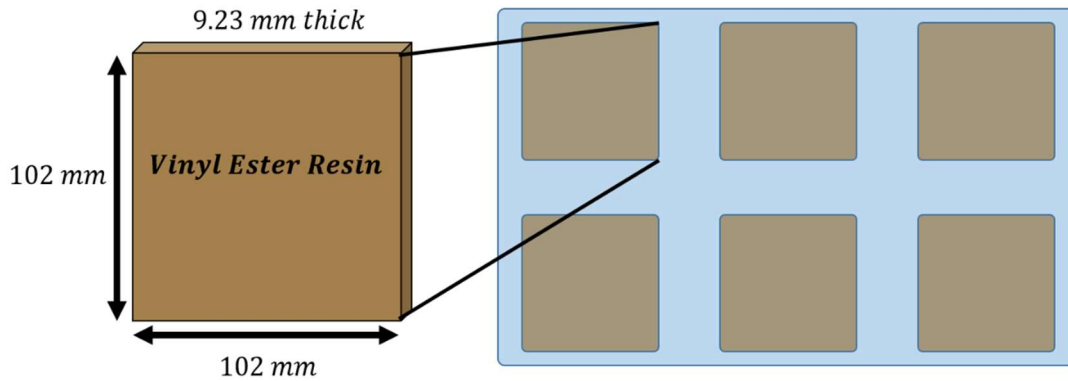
Specimen Dimensions and Silicone Mold Representation
